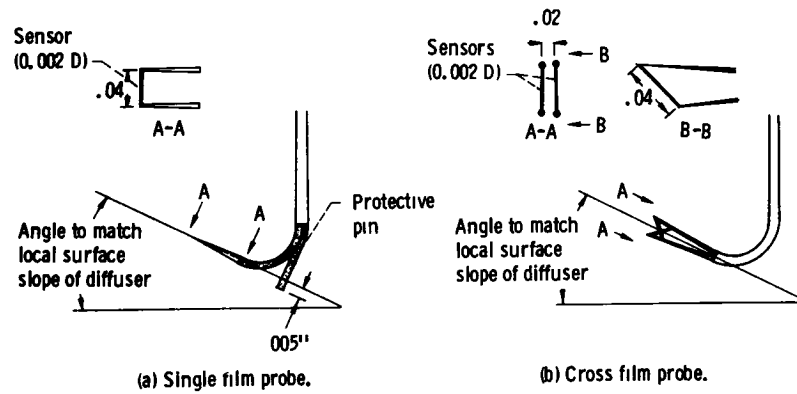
Hot film anemometry probe details (all dimensions shown are in in.).
